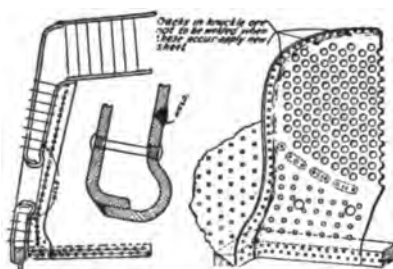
KNUCKLE CRACKS NOT TO BE WELDED.
